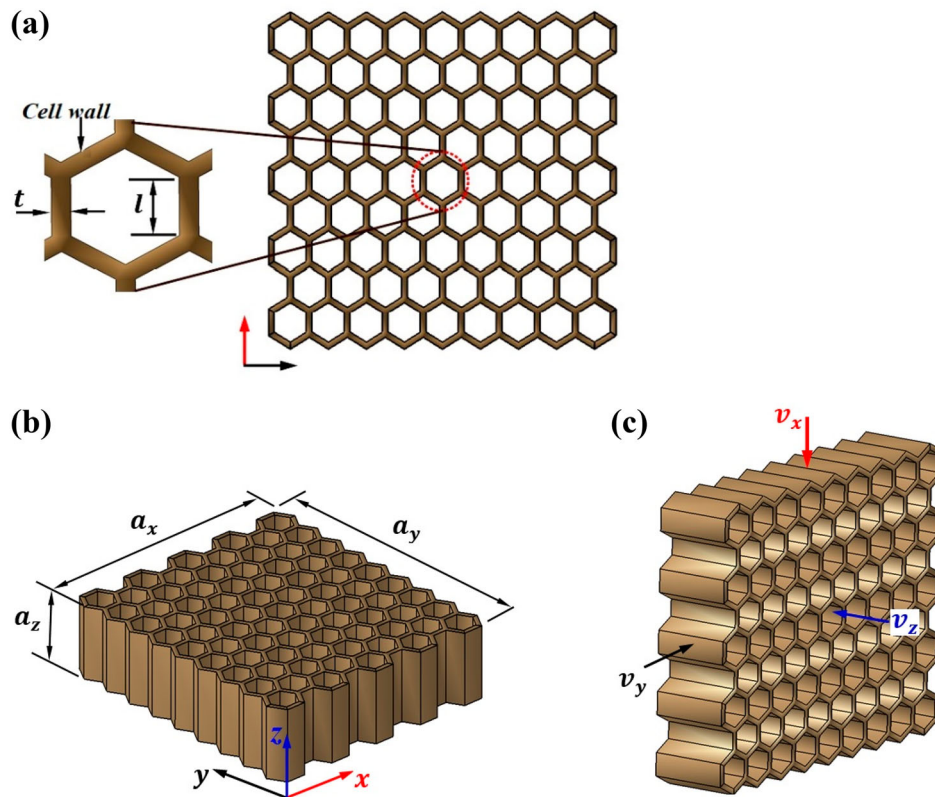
CAD model (a) 2D view of honeycomb structure with the exploded view of its cell wall (b) 3D view of honeycomb structure showing its dimensions, xy printing plane and build direction along the z -axis (c) 3D view of honeycomb structure showing in-plane crushing in x - and y -directions, and out-of-plane crushing in z -direction.
